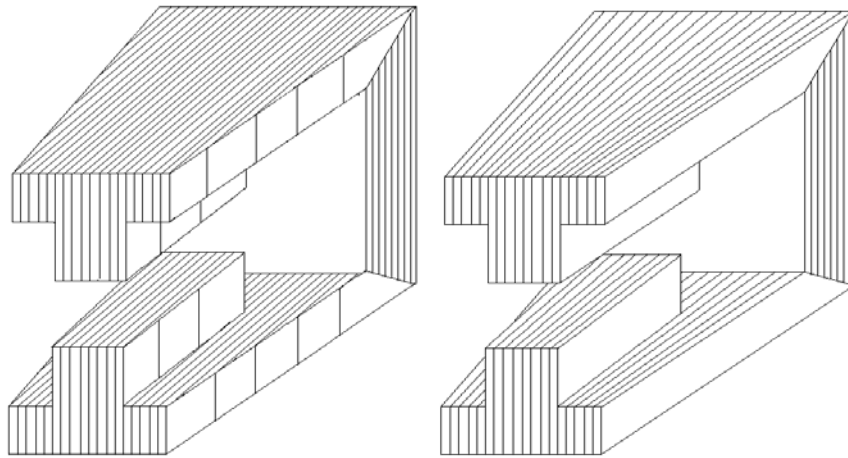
Stator Tooth & Back Iron Construction: Spiral Wound Back Iron & Laminated End Plates
